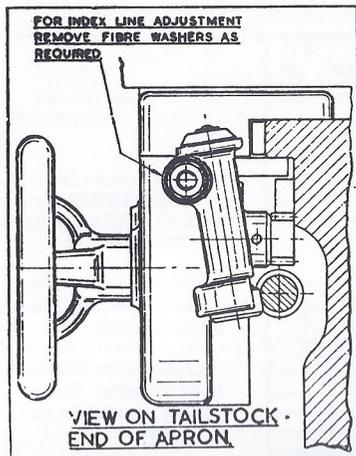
Thread Dial Indicator Mounting for ML7 Lathe
